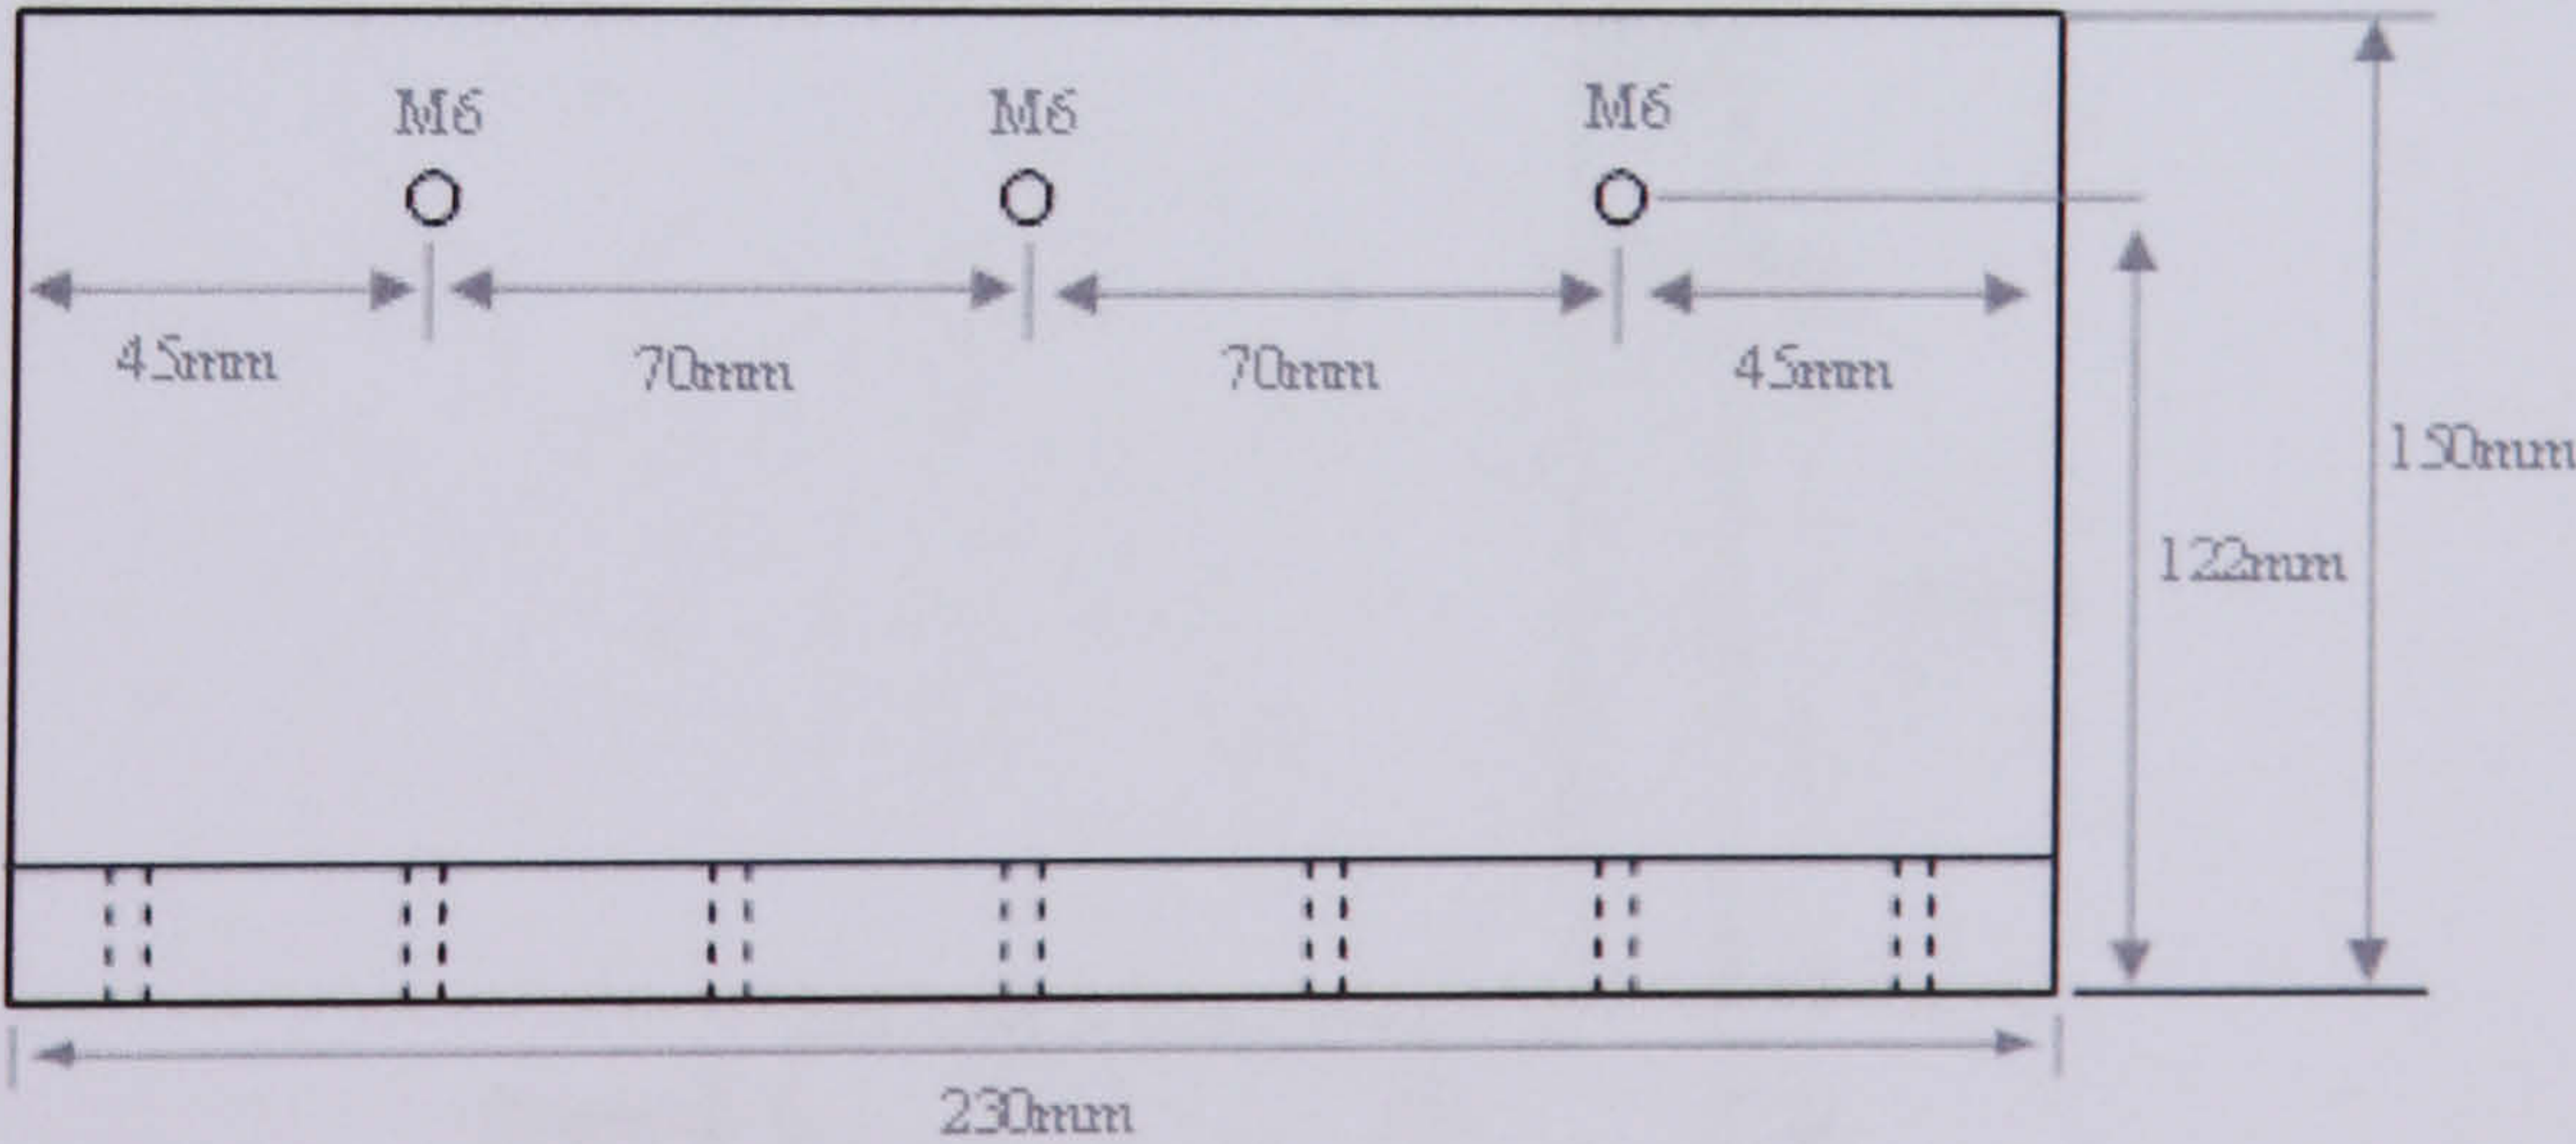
Side view dimensions of the floor component mount holder for the focusing unit, beam splitter and mirror.
